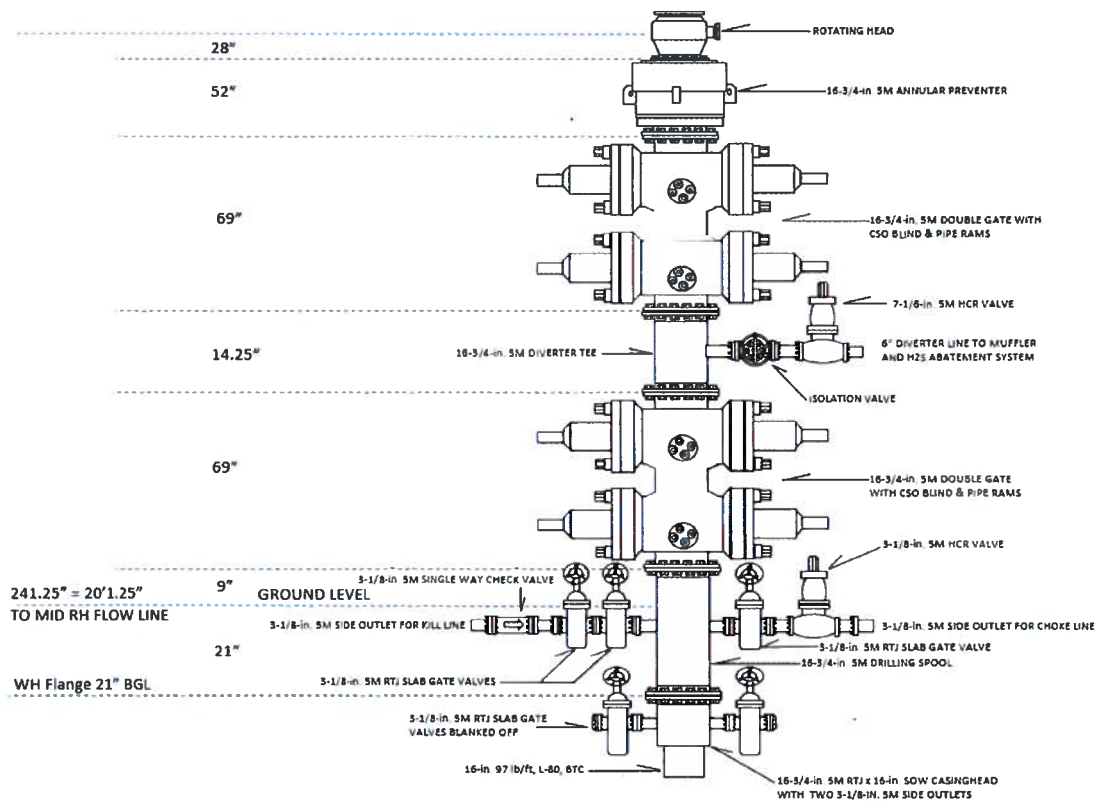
16-3/4-inch BOPE for 16-inch casing while drilling 14-3/4-inch hole.
